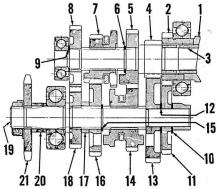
Cross sectional view of transmission assembly, Refer to Fig. BS2-21 for legend.
